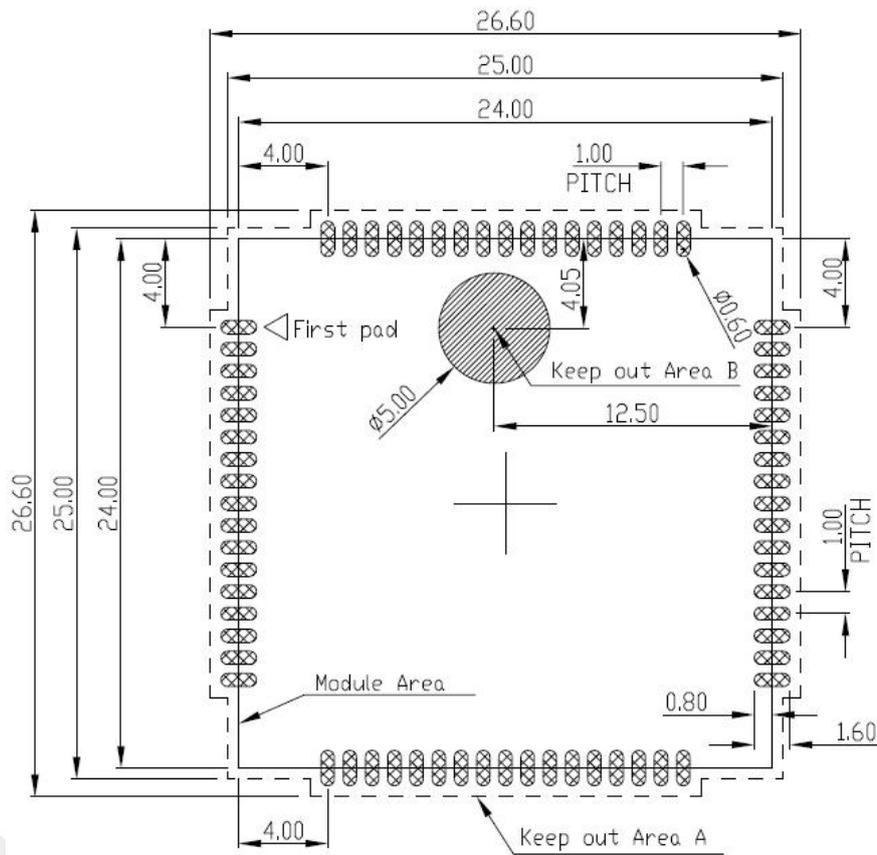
Recommended PCB footprint outline for SIM800F (Unit: mm)
